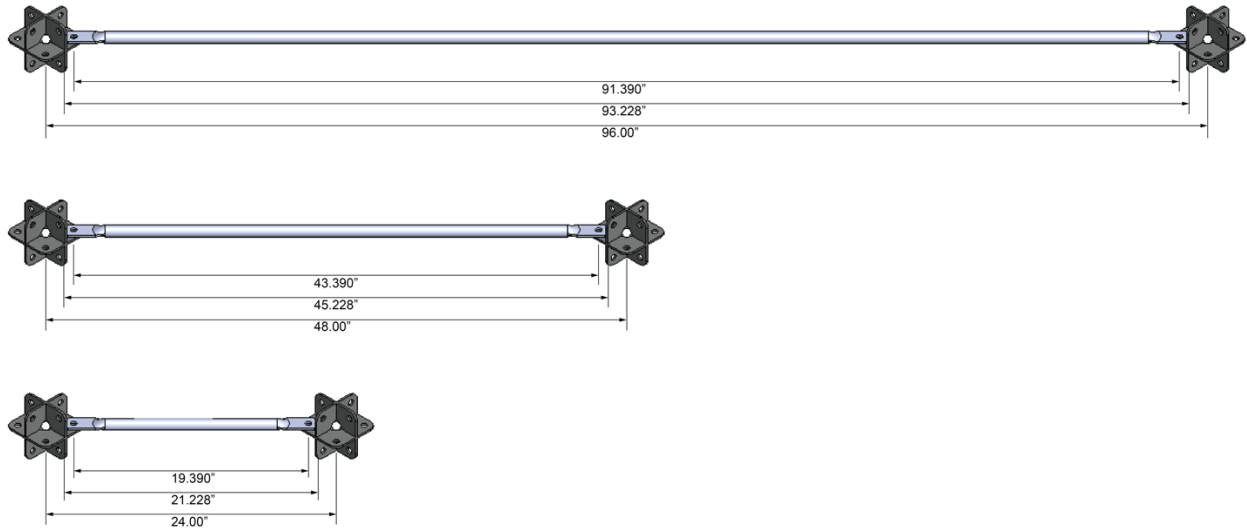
Strut dimensions for nominal 8ft, 4ft, and 2ft units (Top to bottom). Hole-to-hole length, cut length and nominal length.
